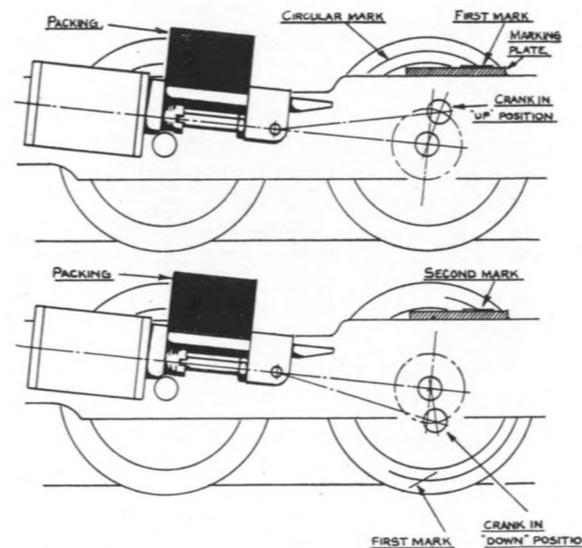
Finding the back "dead centre" position of the crank. Top—making the first mark. Bottom—making the second mark.
